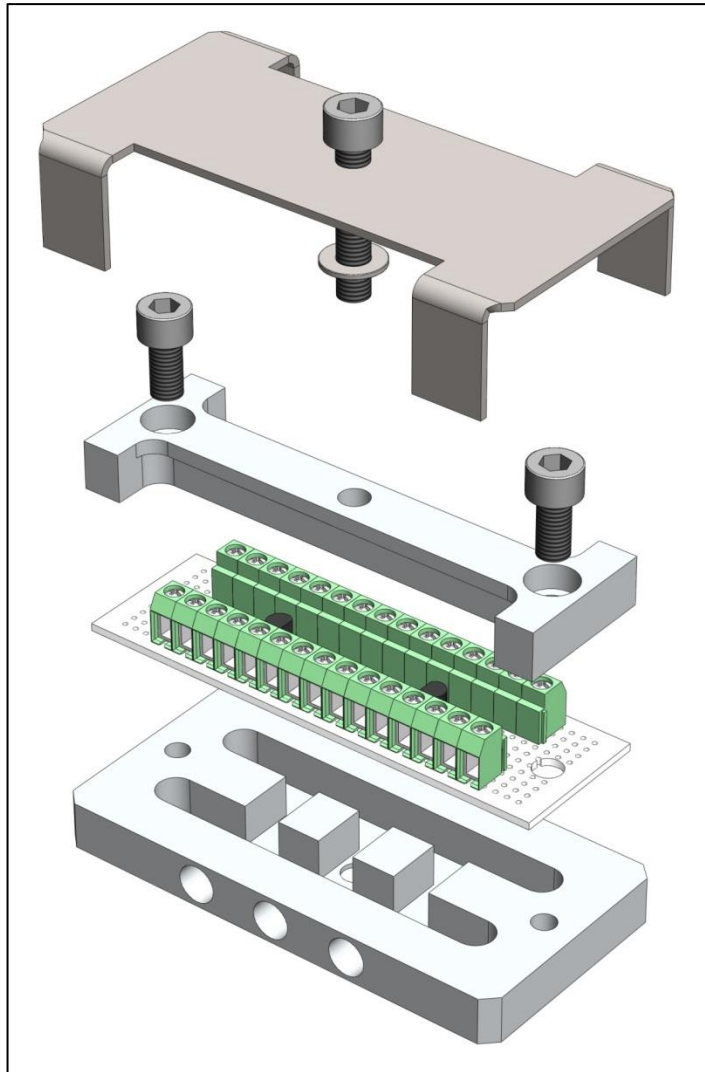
Exploded view of the cold junction reference assembly CAD model.
